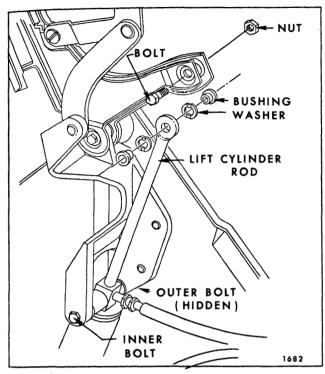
"B and C" Body Hydraulic Lift Cylinder Attachment
